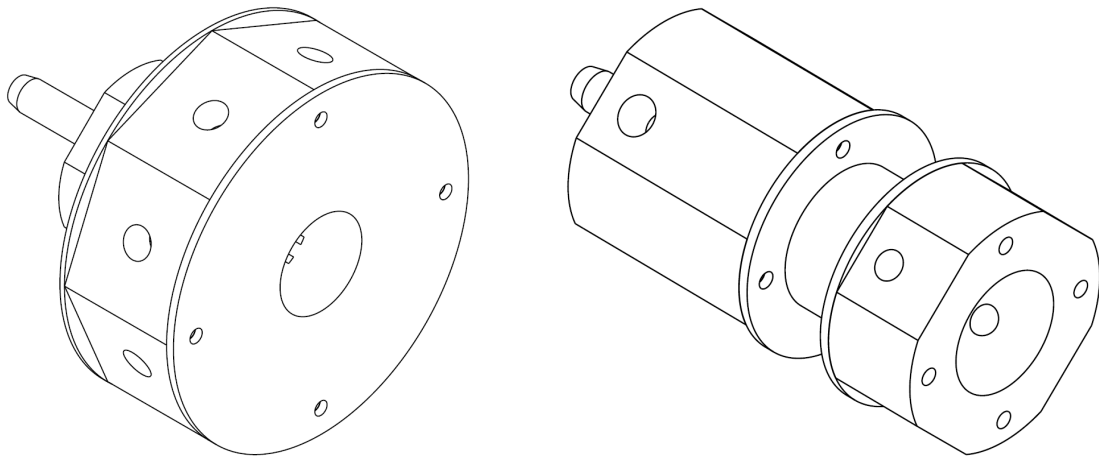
Technical isometric drawing of the radial swirler module Figure 3.9: Technical isometric drawing of the axial swirler module
